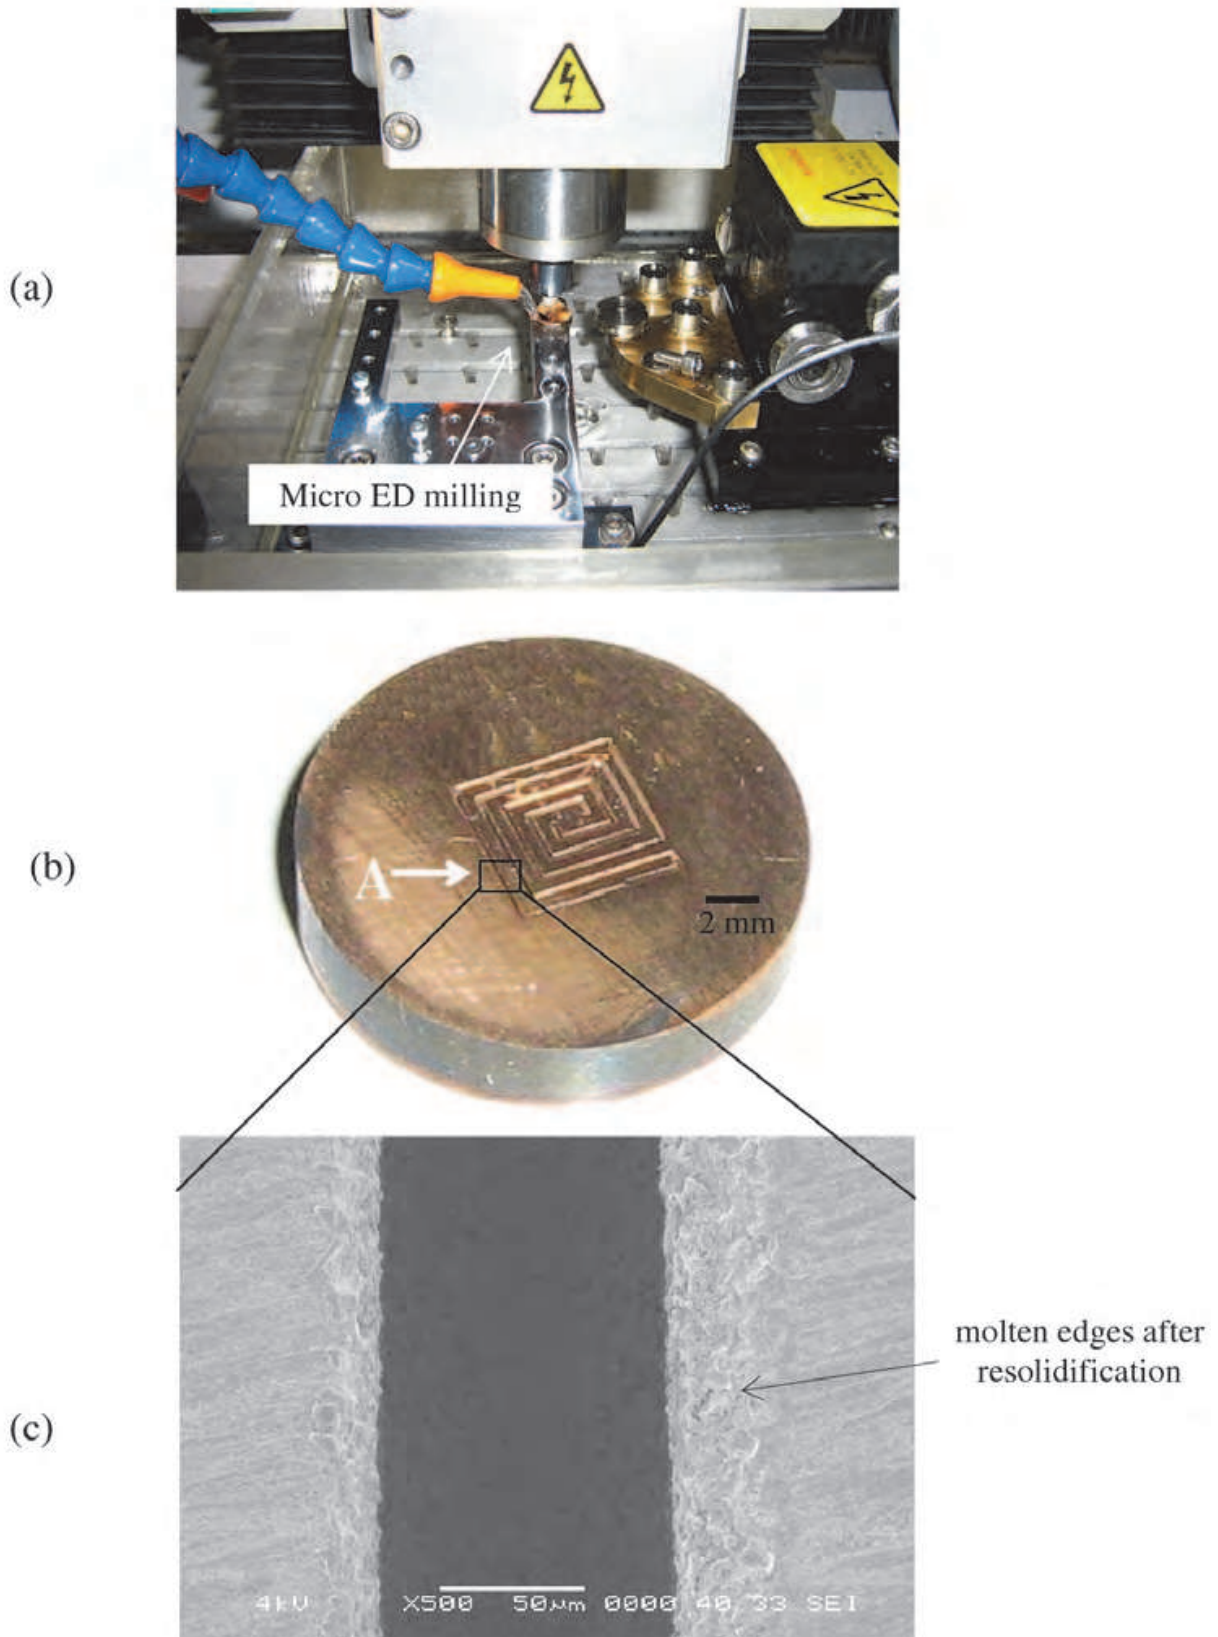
Fabrication of micro swiss-roll combustor mold cavity by micro ED milling: (a) picture during micro ED milling, (b) fabricated micro swiss-roll combustor mold cavity, (c) SEM micrographs of window A in Figure 4.5 b.
